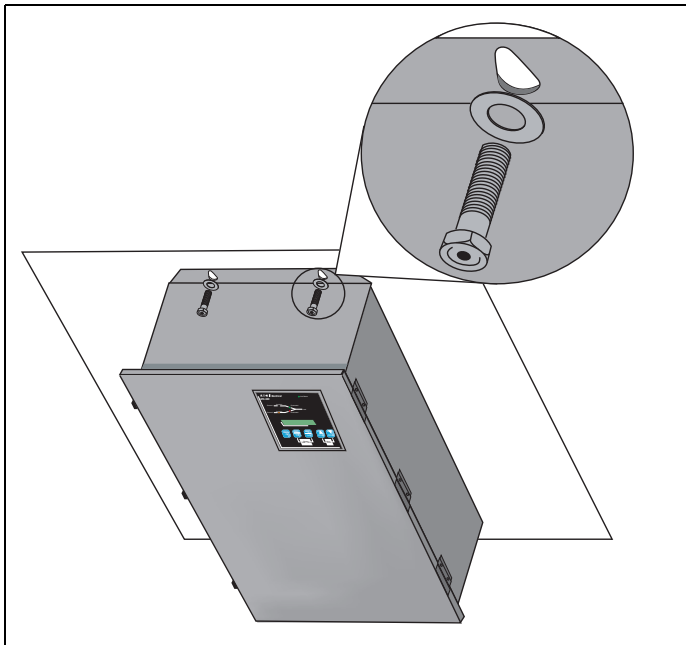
Typical Mounting of the ATS to a Mounting Surface.
